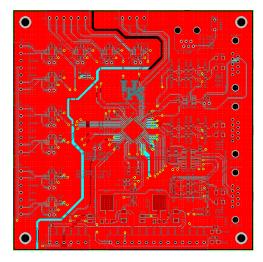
PCB CAD Drawing (Scale 1:2)
